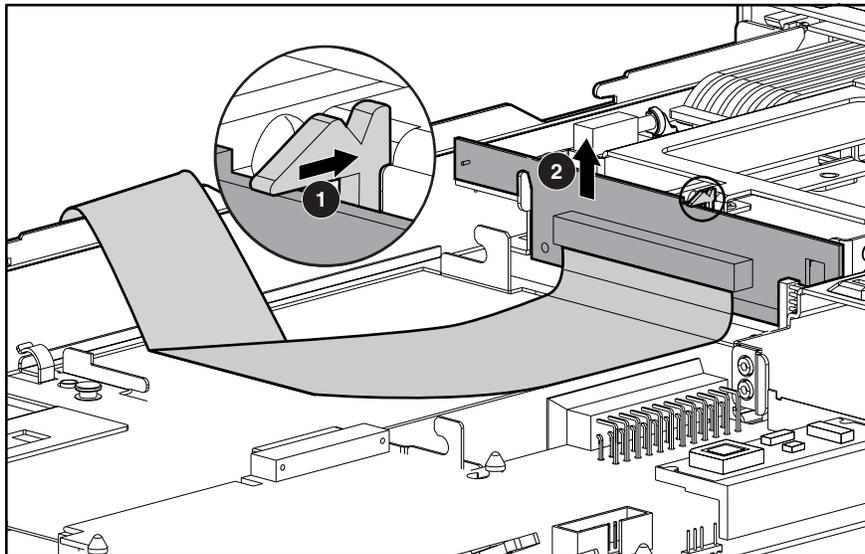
Removing CD-ROM (DVD-ROM)/diskette drive assembly backplane from chassis
